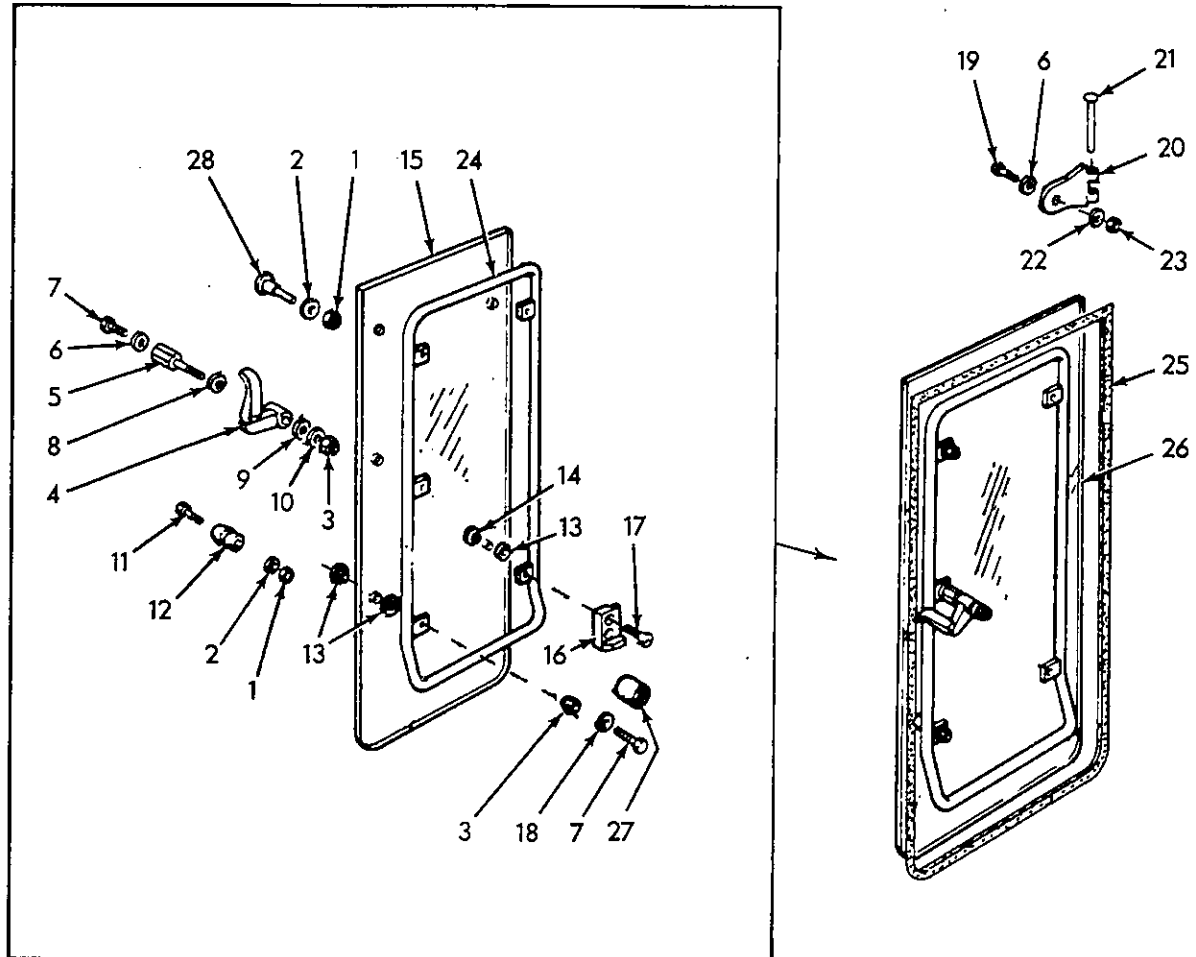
RIGHT SIDE DOOR ASSEMBLY
